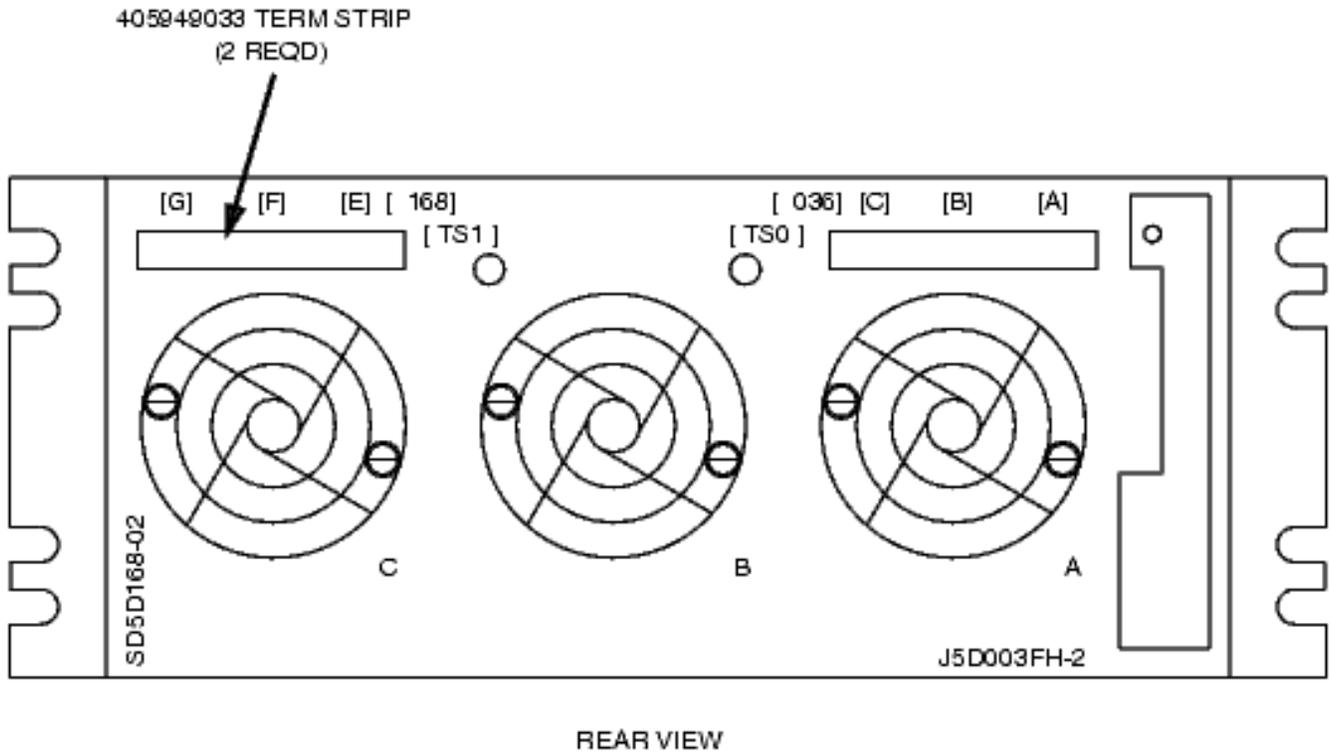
Fan Assembly (3-6 Fans) Rear View - J5D003FH-2
